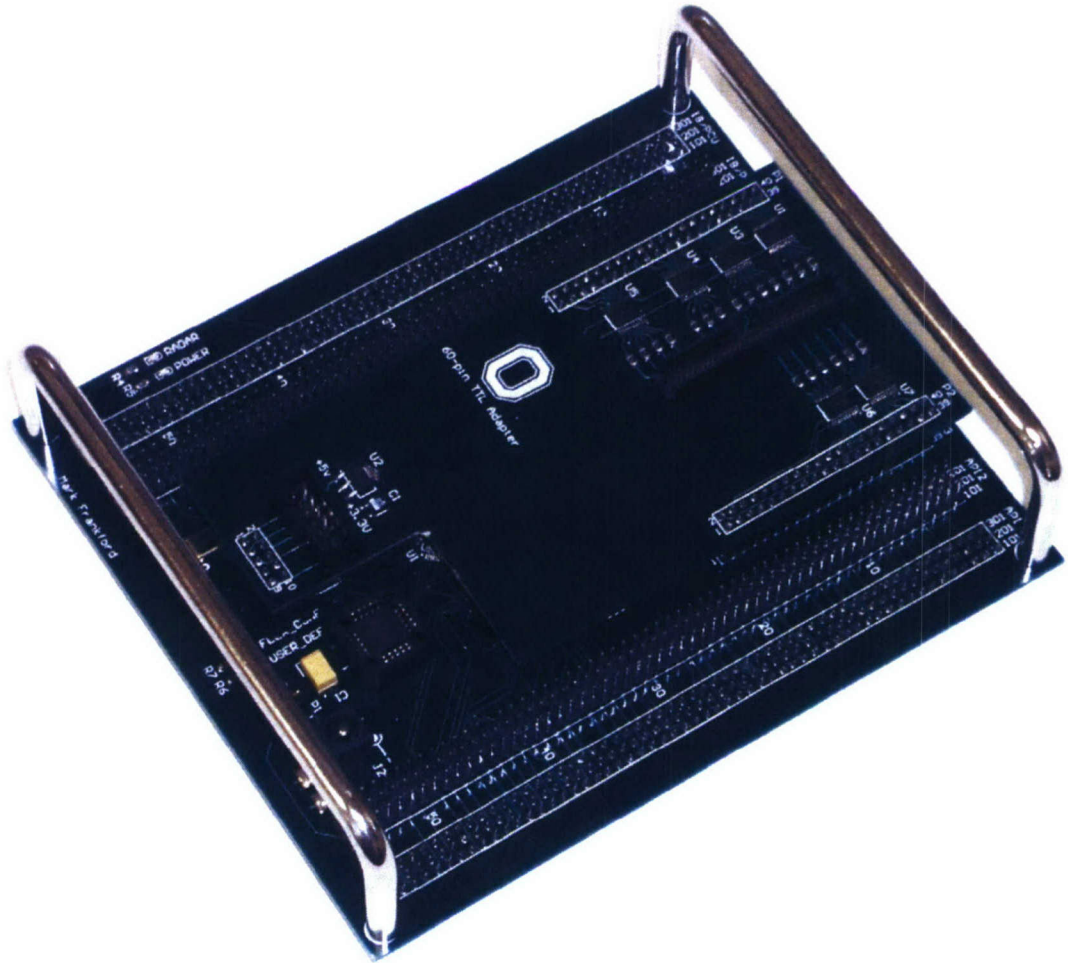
Top view of the completely assembled HSCD main board with daughter board attached.
